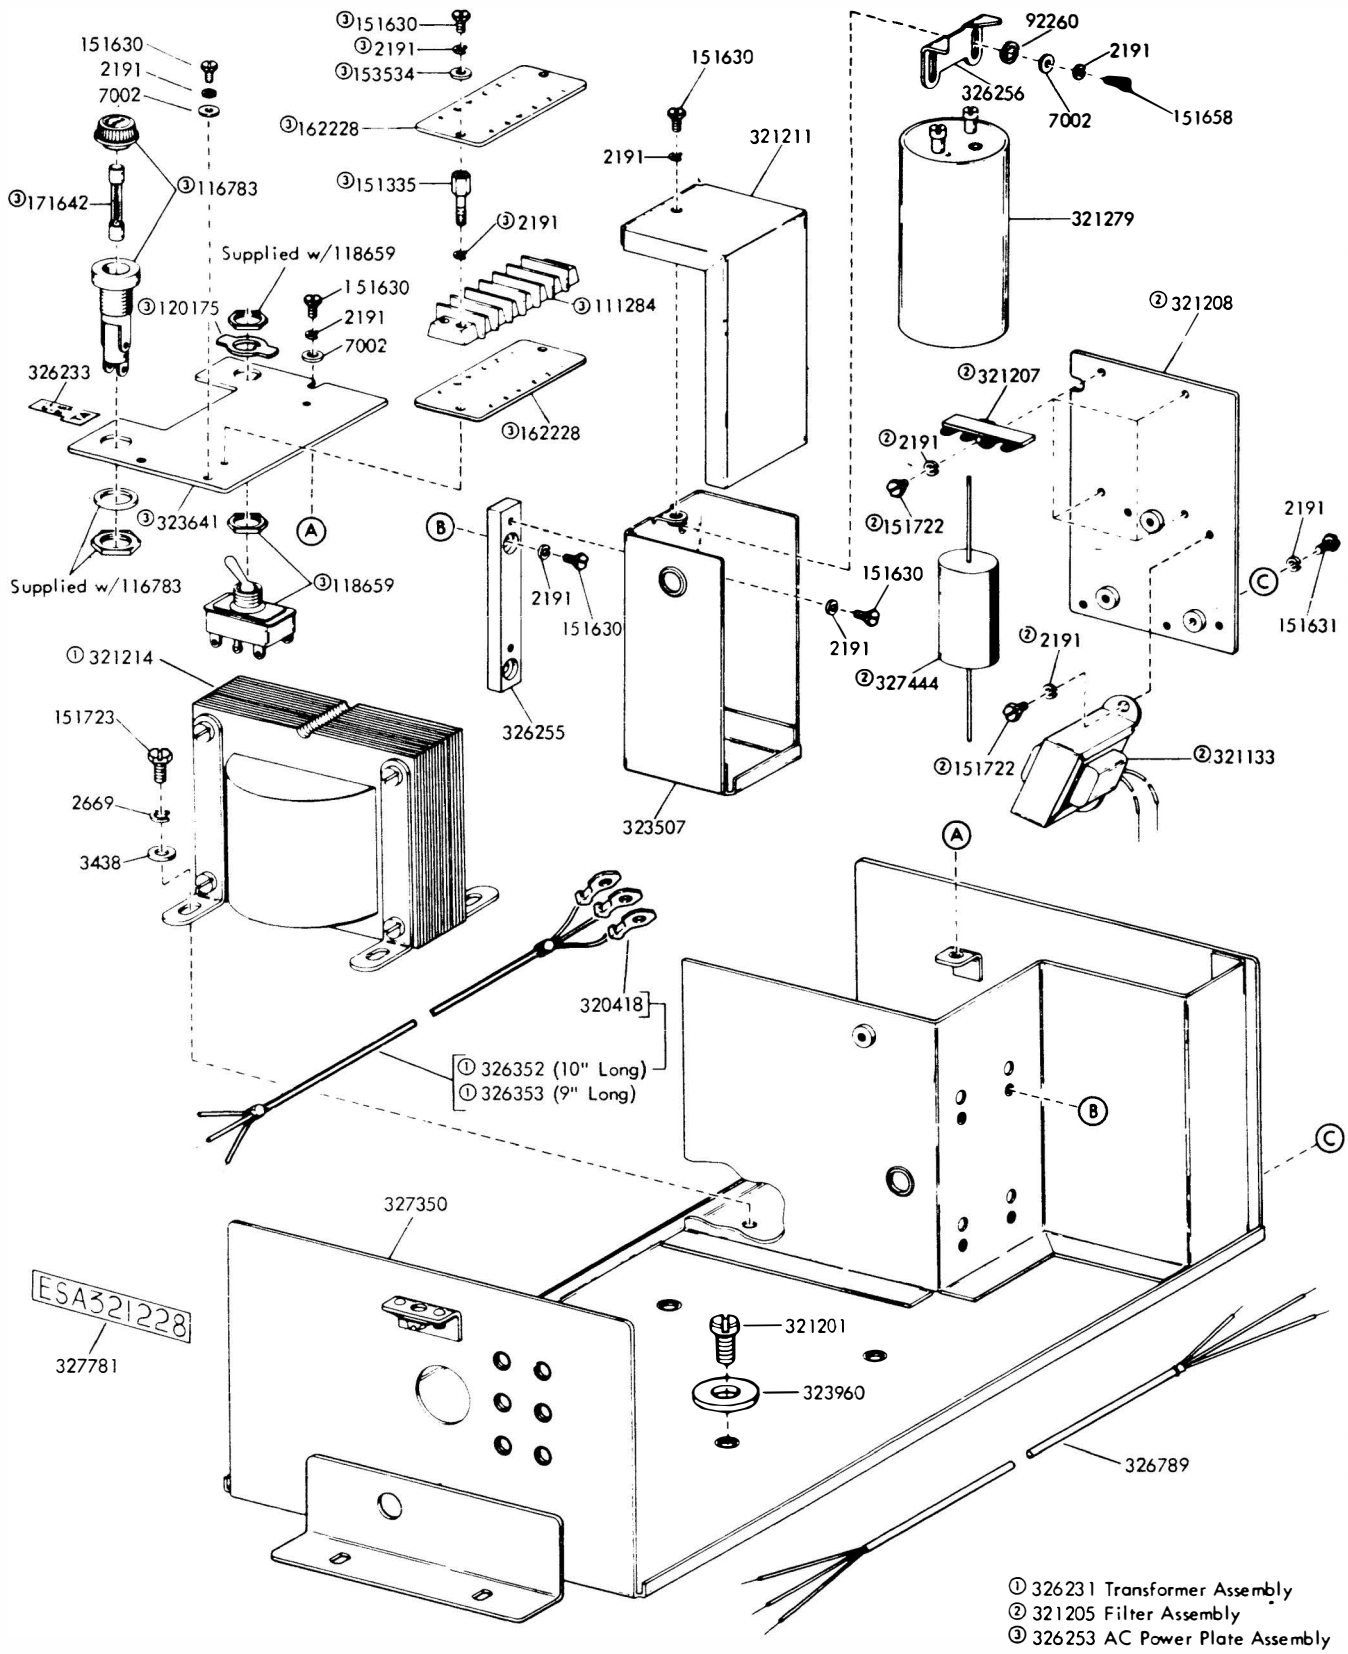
321228 ELECTRICAL SERVICE ASSEMBLY
